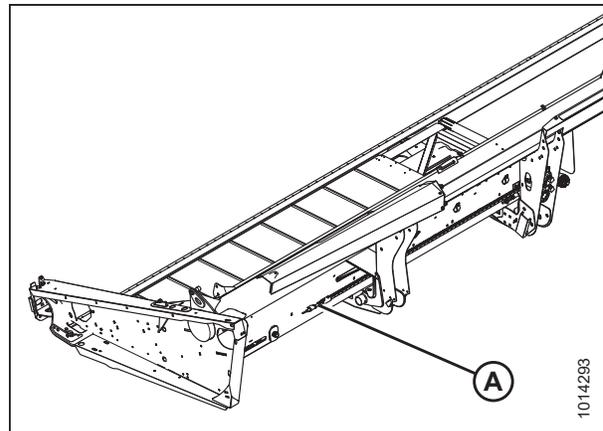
Chain Adjustment Bolt – Left Shown, Right Similar
